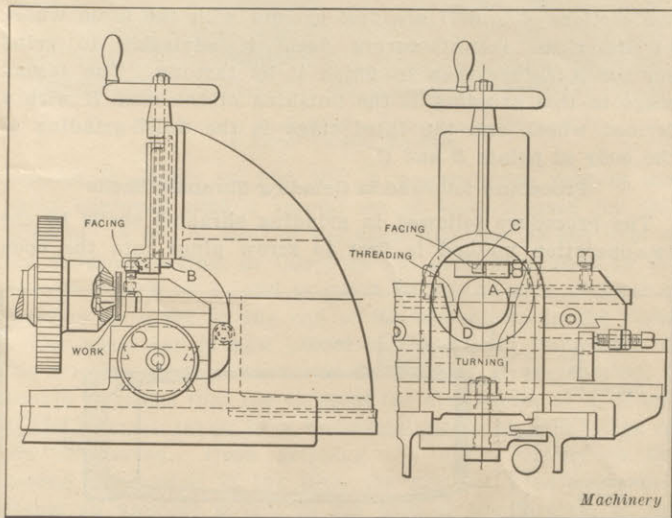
Turning, facing, and threading Plugs for Closed End of Bar Stock Shrapnel Shells in "Automatic" Threading Lathe
